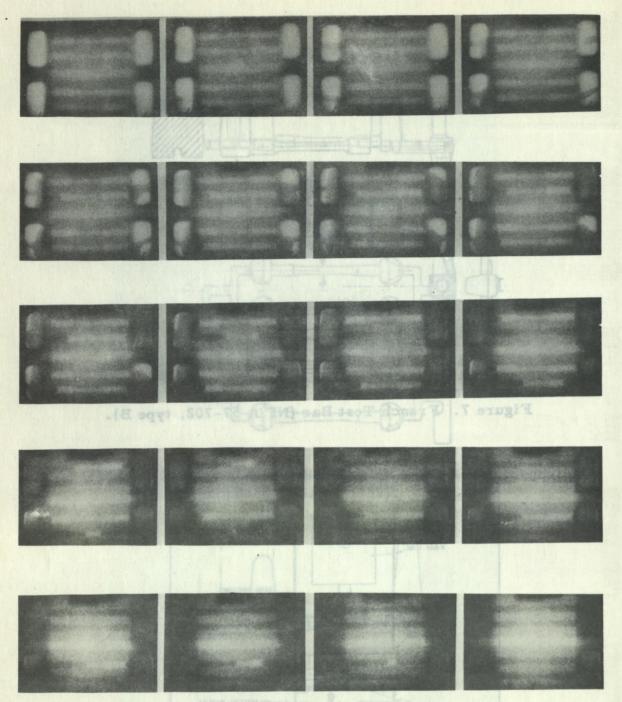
AFS Mould. Series of stills from a motion picture showing C4 alloy poured at 700 °C (1290 °F). The empty mould is shown at the left hand end of the top row and the full mould at the right hand end of the bottom row. The position of the sprue was at the top of the field and the advancing metal stream is indicated by the darkening of the test bar image. The stills were taken from every third frame of the motion picture so that the time interval between shots is approximately 3/13 second.
